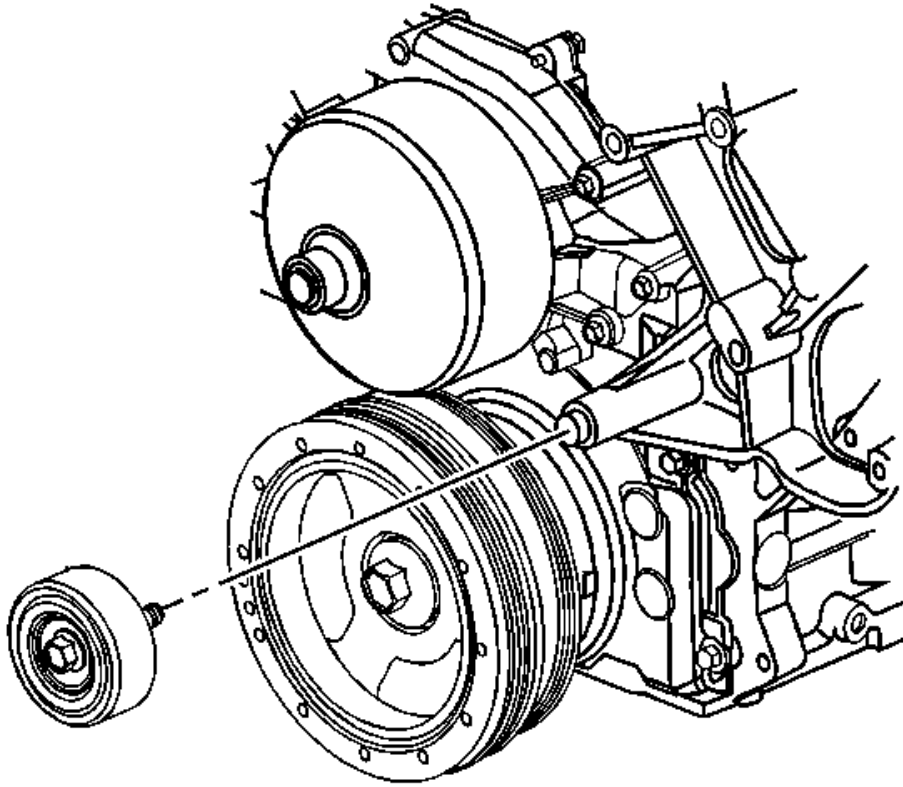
Locating Accessory Drive Belt Idler Pulley & Bolt
